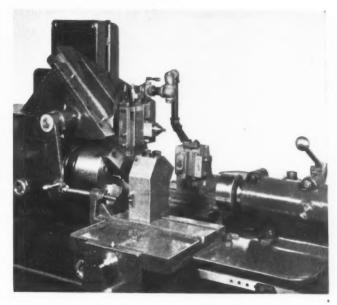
Automatic Lathe Equipped for Machining Copper Rotating Band on Shells
